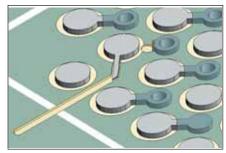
Remove BGA pad & mill shallow channel into solder mask surface.
